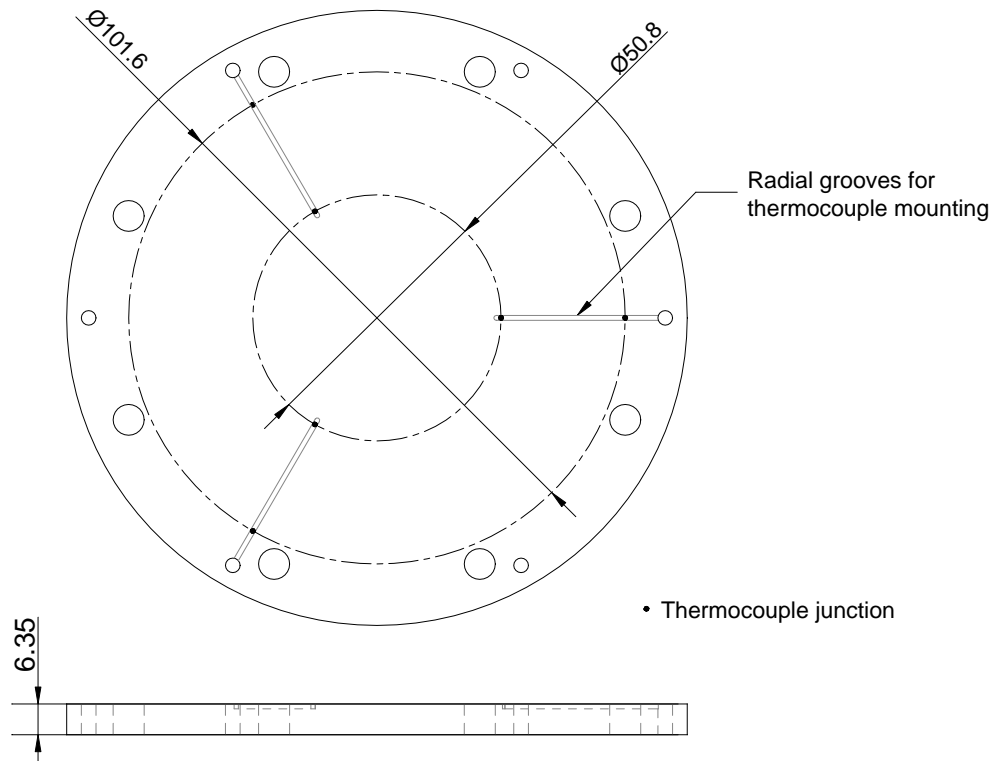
Copper plate P₂ showing radial grooves for thermocouple mounting. Dimensions in mm. Figure from [32].
